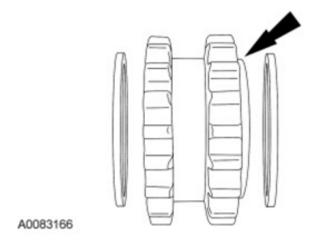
Identifying Crankshaft Sprocket Flange Courtesy of FORD MOTOR CO.
